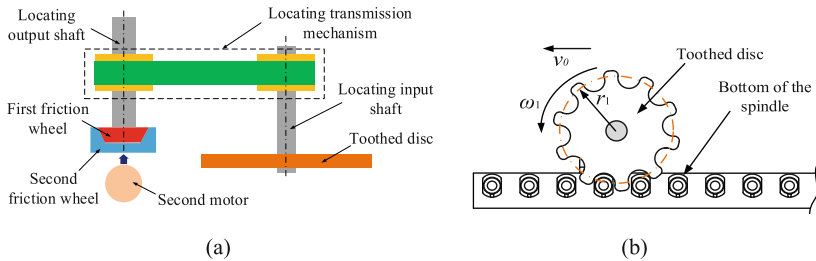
The mechanism principle of the locating device of the SCMG robot
